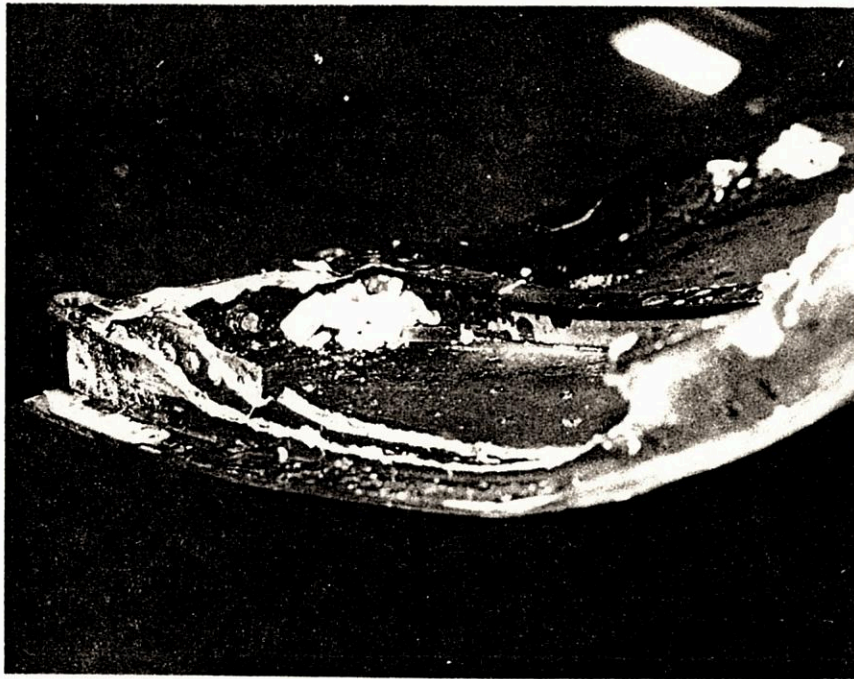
DAMAGED INTERNAL BRACING AT BOTTOM FORWARD
